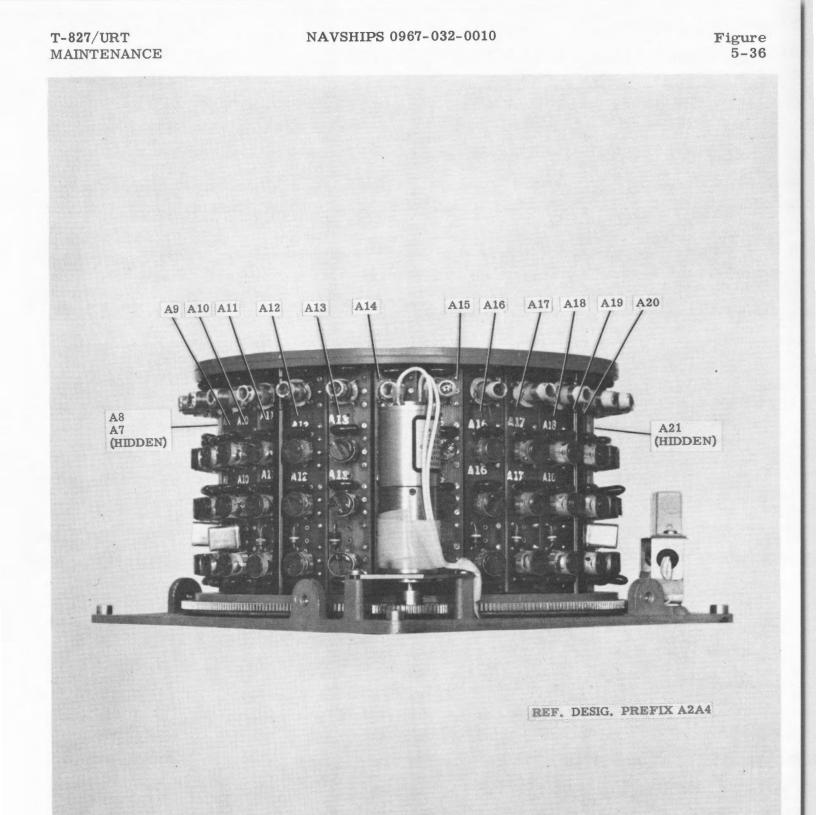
RF Amplifier Electronic Assembly, Rear And Right Side, Component Location ORIGINAL
